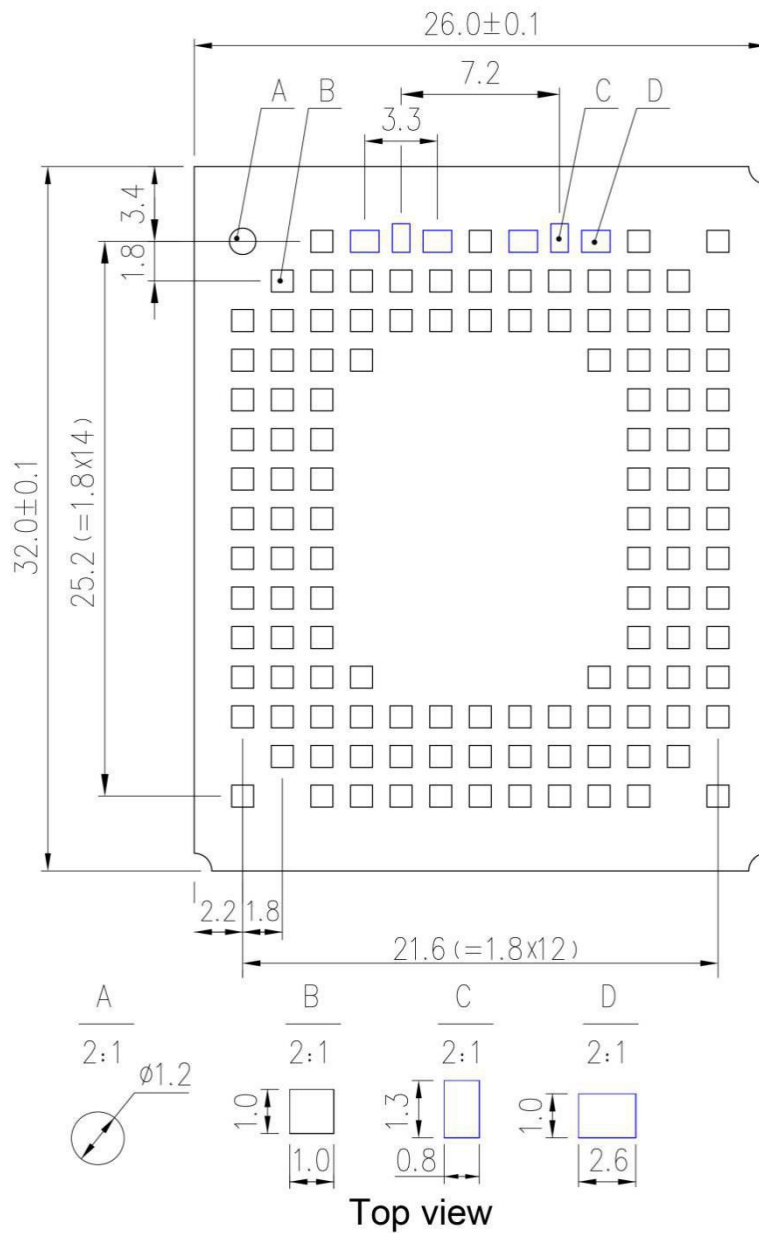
Recommended Design for PCB Bonding Pad (Unit: mm)
